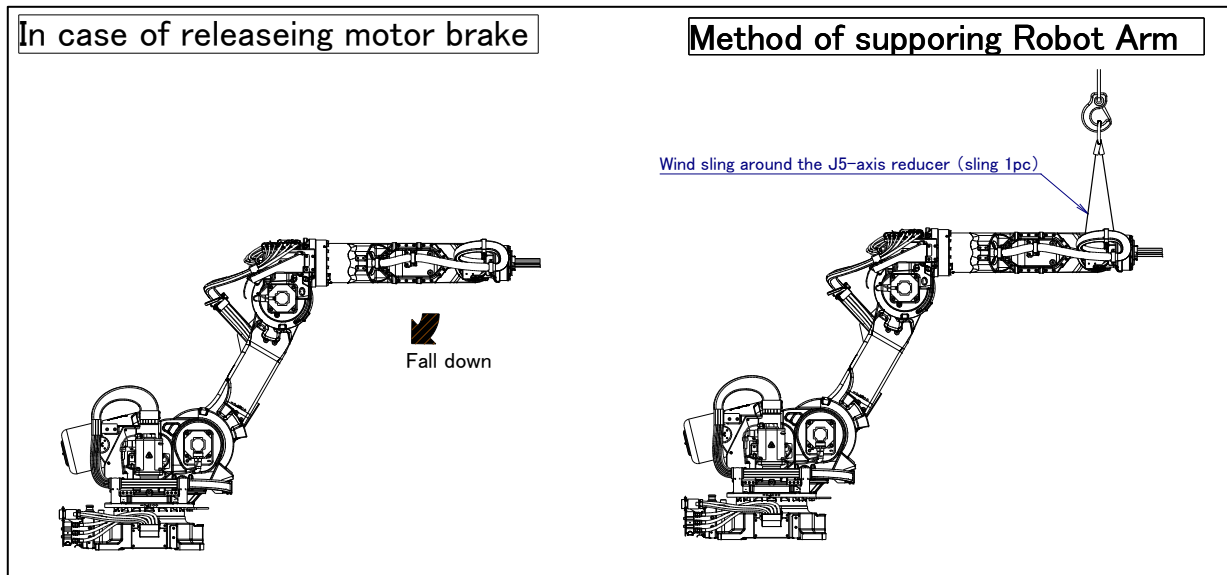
(d) Releasing J3 motor brake and measures (R-2000iB/210FS)
